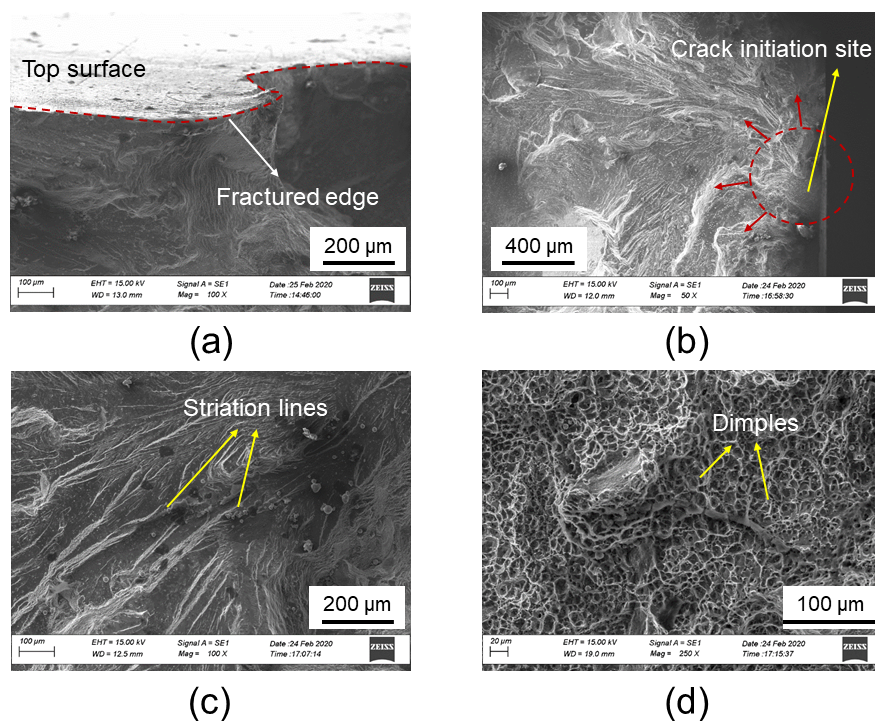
Fractography of laser peened Al6061-T6 alloy showing (a) fractured edge; (b) crack initiation region;
